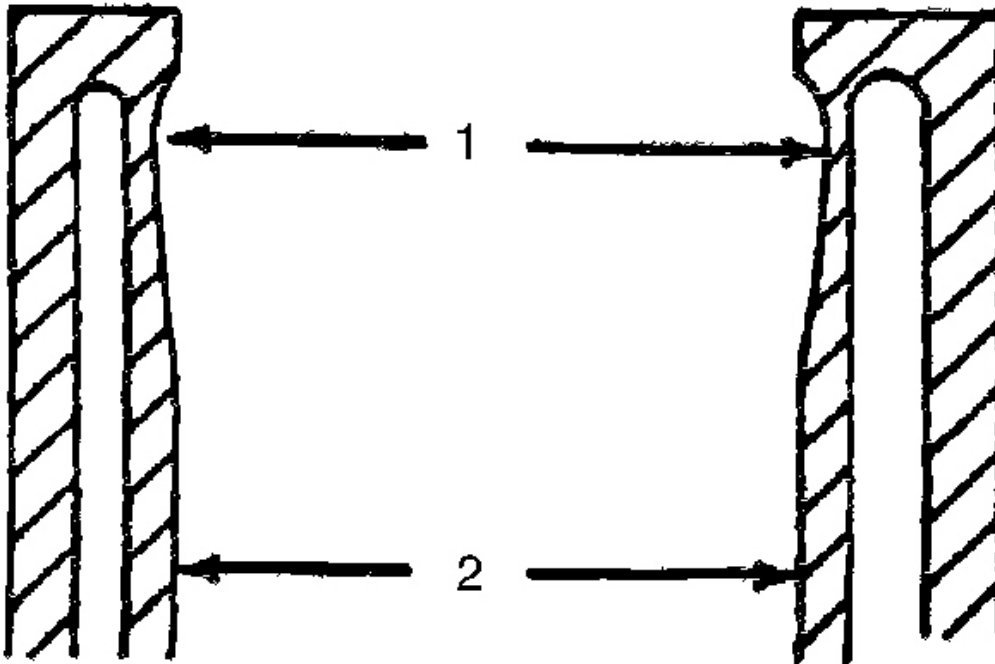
Measuring Points For Cylinder Bore Out-Of-Round And Taper
